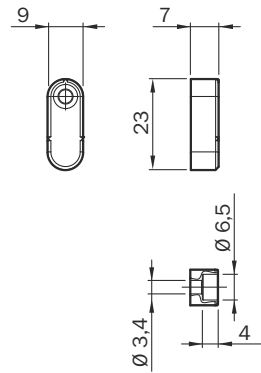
Dimensional drawing of "Mini" safelDS actuator
